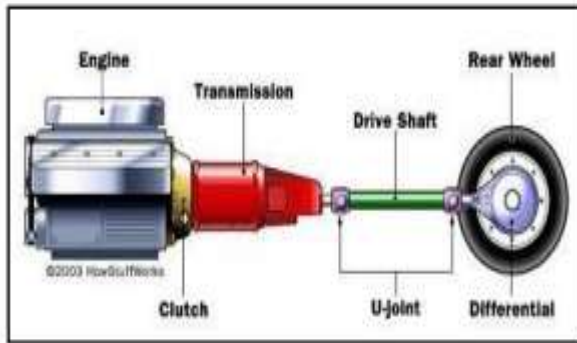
advanced one piece composite drive shaft for rear wheel drive vehicle
